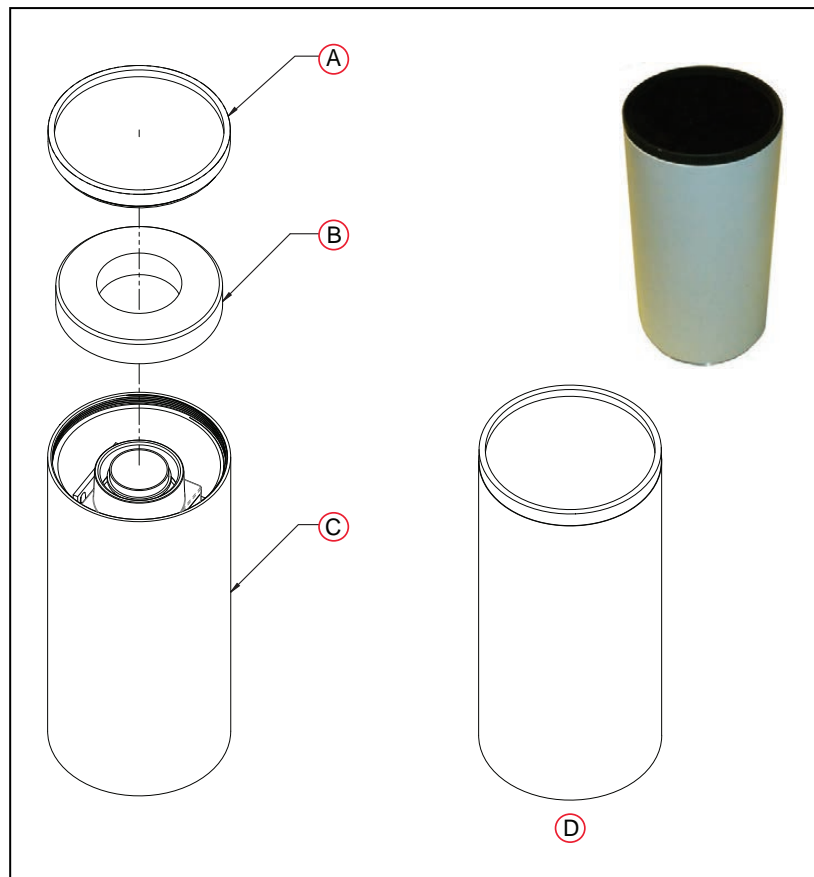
(A) Filter, (B) Foam Seal, (C) Tube, and (D) Completed Assembly
